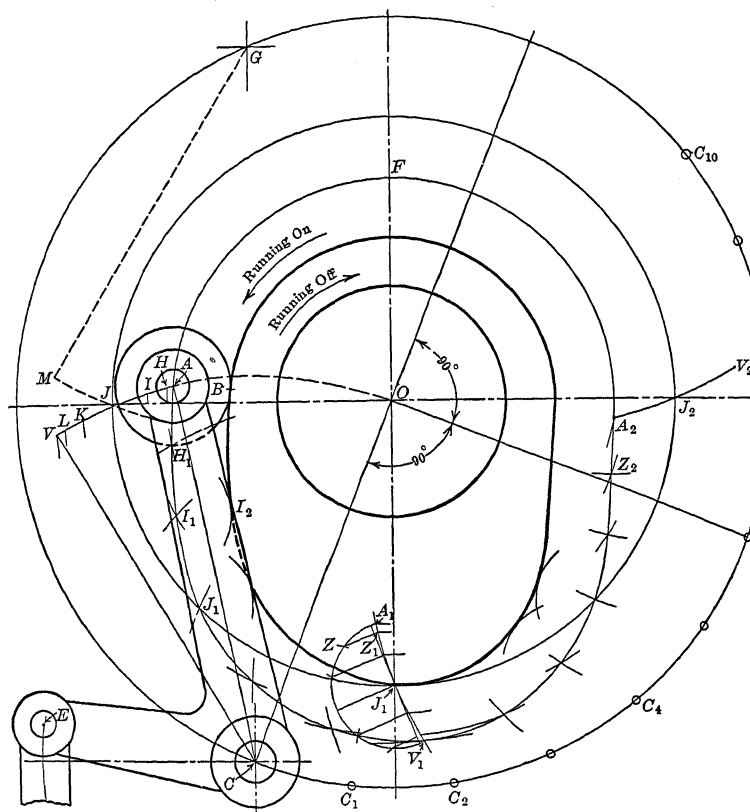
PROBLEM 9, CAM WITH SWINGING FOLLOWER ARM, ROLLER CONTACT—SWINGING ARM, CONTINUED, PASSES THROUGH CENTER OF CAM
